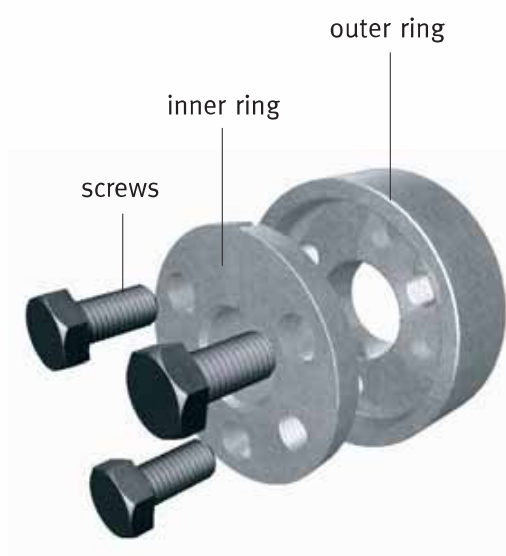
MAV shrink disc 3008 used to mount hollow shaft gearbox onto driven shaft
